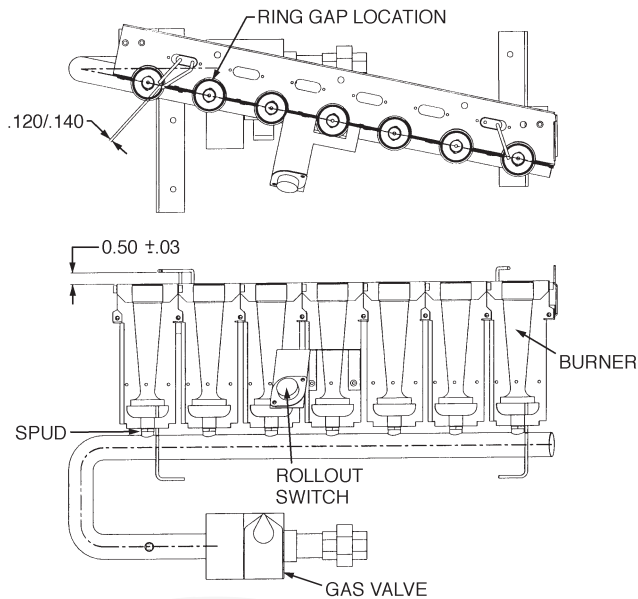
Burner Section Detail — 2-Stage and Staged Gas Units
